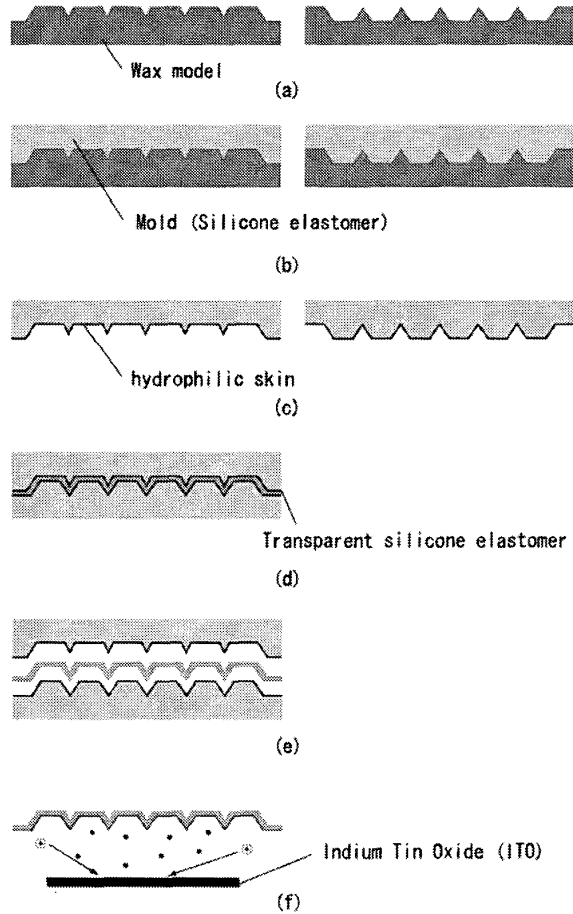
Fabrication process flow: (a) 3D wax model (b) female mold fabrication (c) surface treatment in hydrophilic (c) pouring of silicone elastomer (d) removal of molding (f) ITO electrode sputtering
